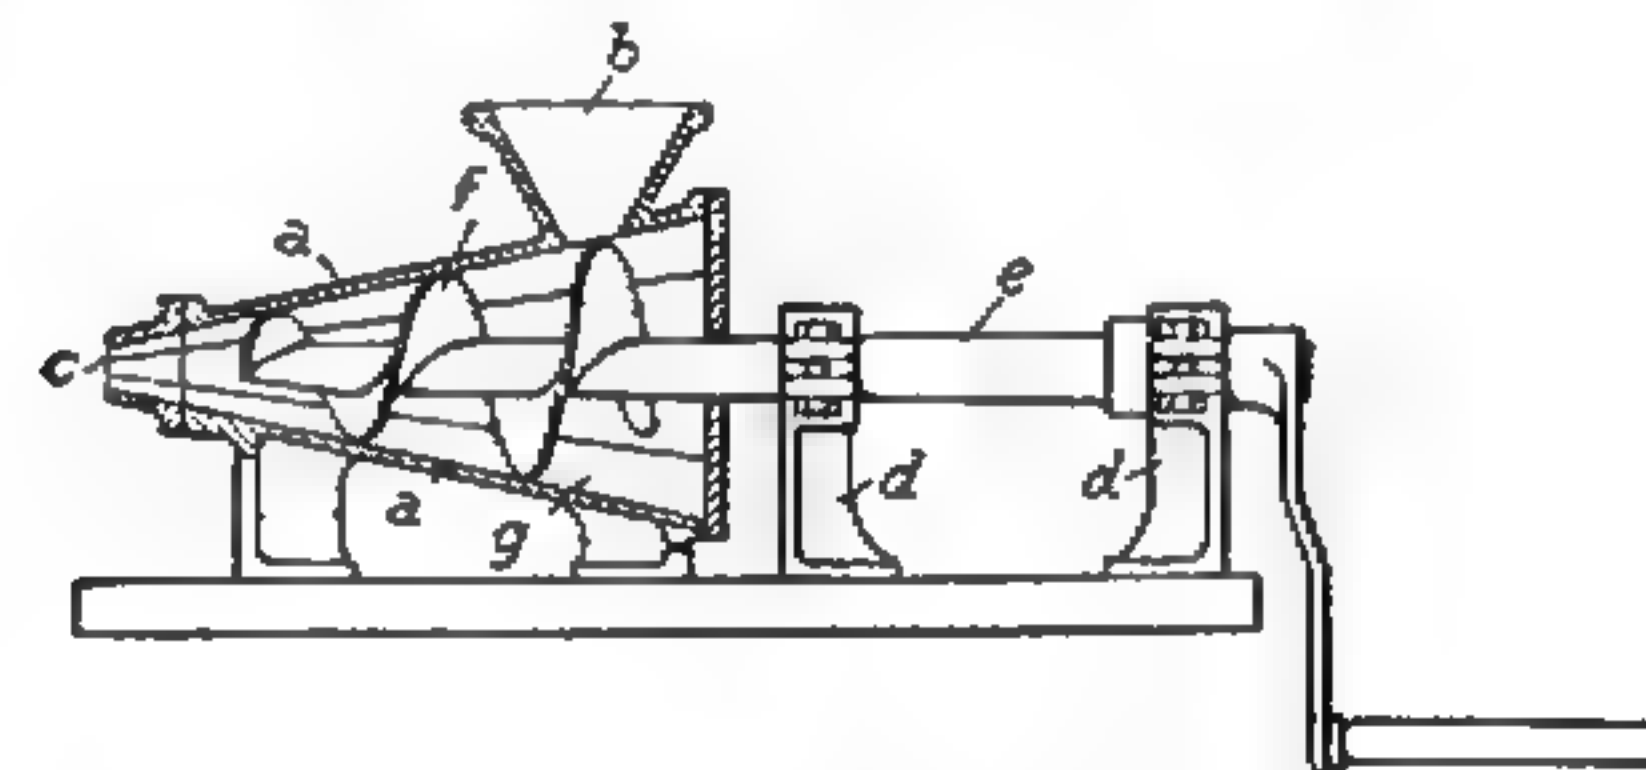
SAUSAGE MACHINE FOR PACKING GELATINE
